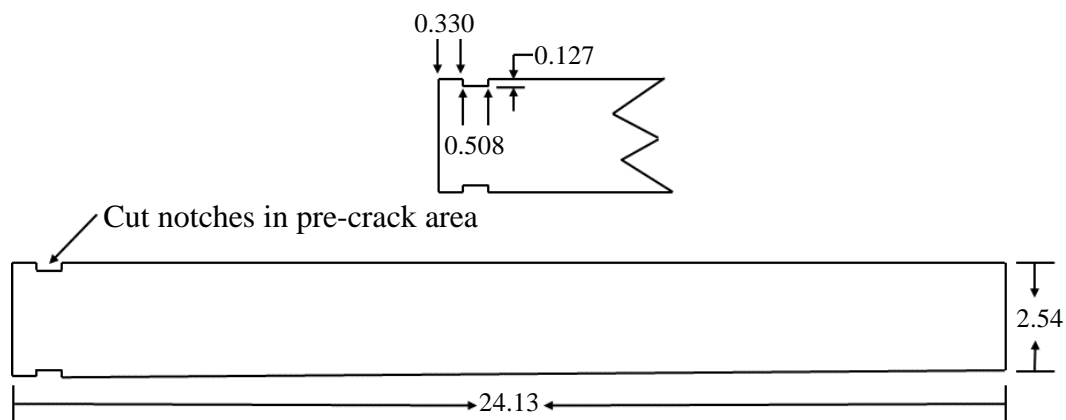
DCB Specimen geometry. Notches are for securing specimen to clevis grip. Measurements are in centimeters.
